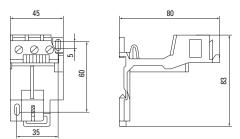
Overall dimensions of mounting base for thermal overload relay RTE 1304-1322 EKF
